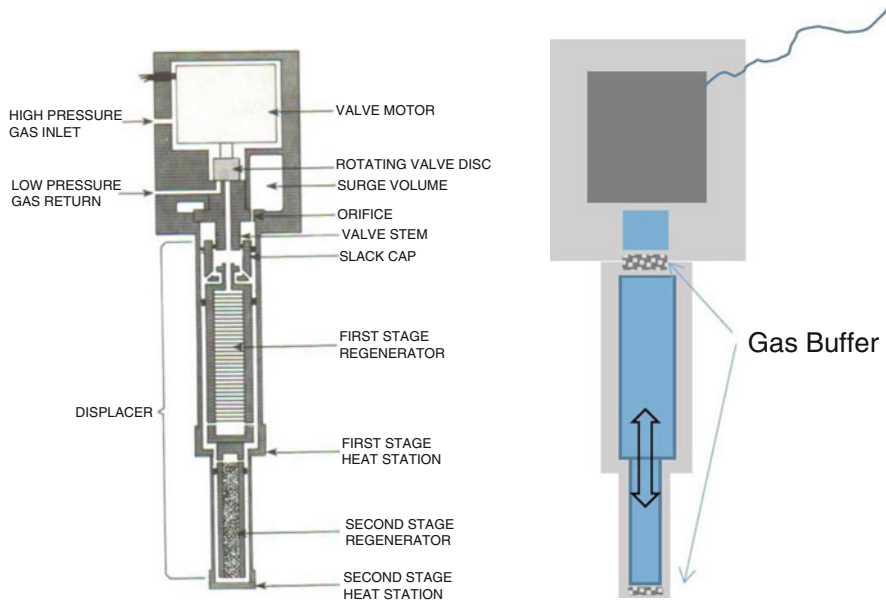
Basic construction of a Solvay Cryocooler's unique pneumatic drive is shown on the left. The moving parts are the displacer and the rotating valve disk. Right-hand side figure depicts the helium gas bubble at the top and bottom of the displacer. There are no mechanical drive components as in the GM cooler. ARS image gallery
